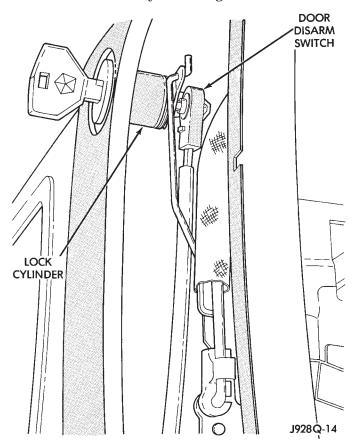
Door Lock Cylinder Switch Remove/Install -Typical
